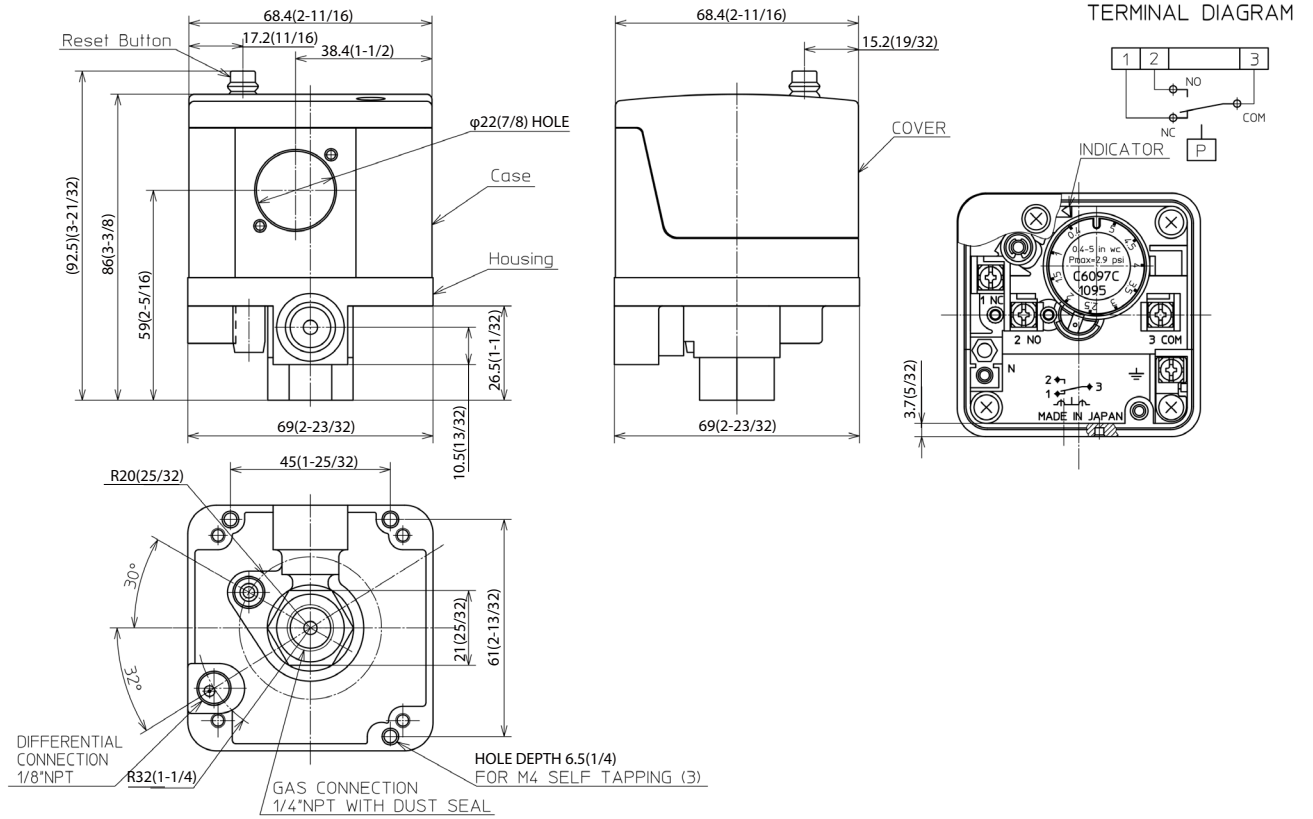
C6097C, D 1/4 in. NPT Mount dimensions in mm(in.)
